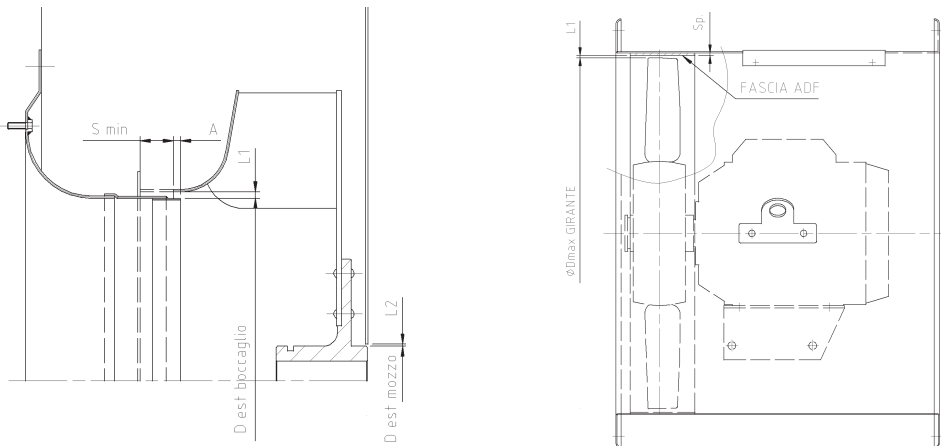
Typical assembly section of a centrifugal fan and an axial fan.
